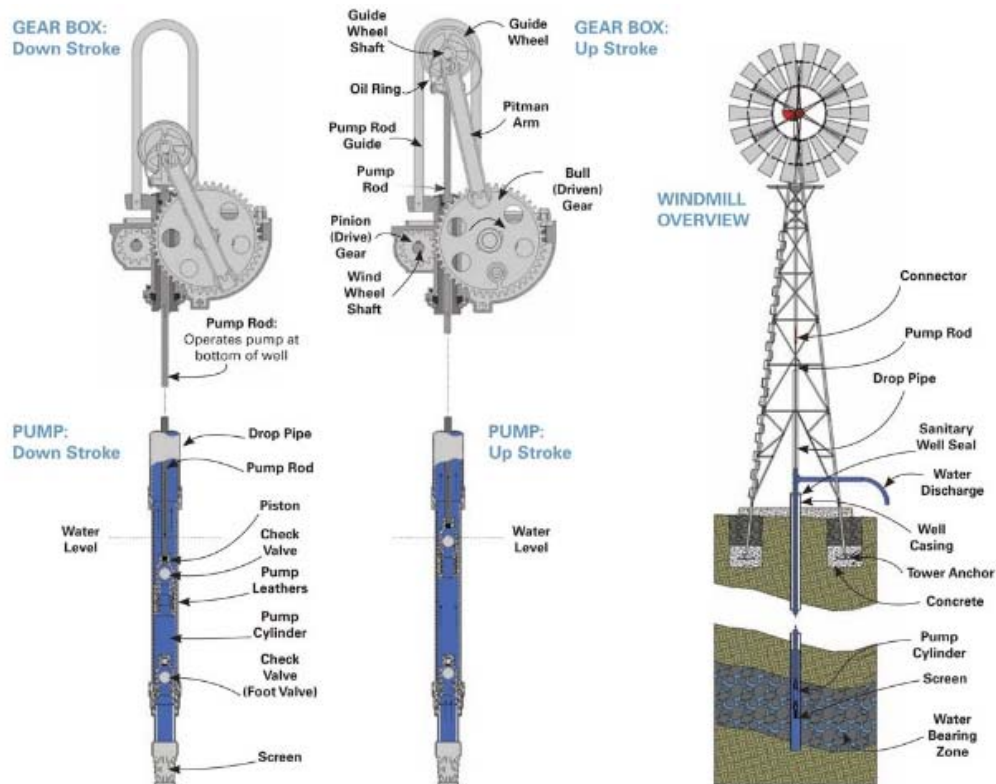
Rotor assembly, structure, pump. Adapted from [*13]
